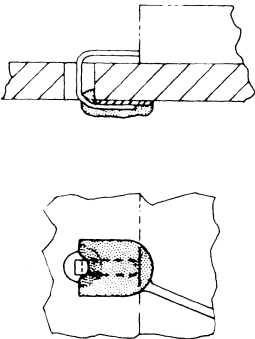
Clinched-lead half-pad interconnection method for RCA flat packs.
